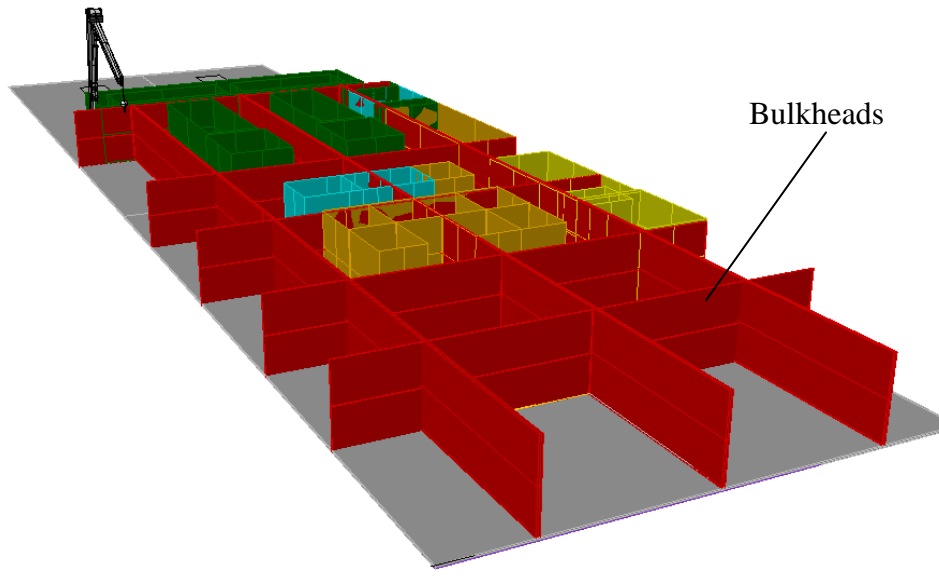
Internal Bulkhead Layout of Cargo Deck
